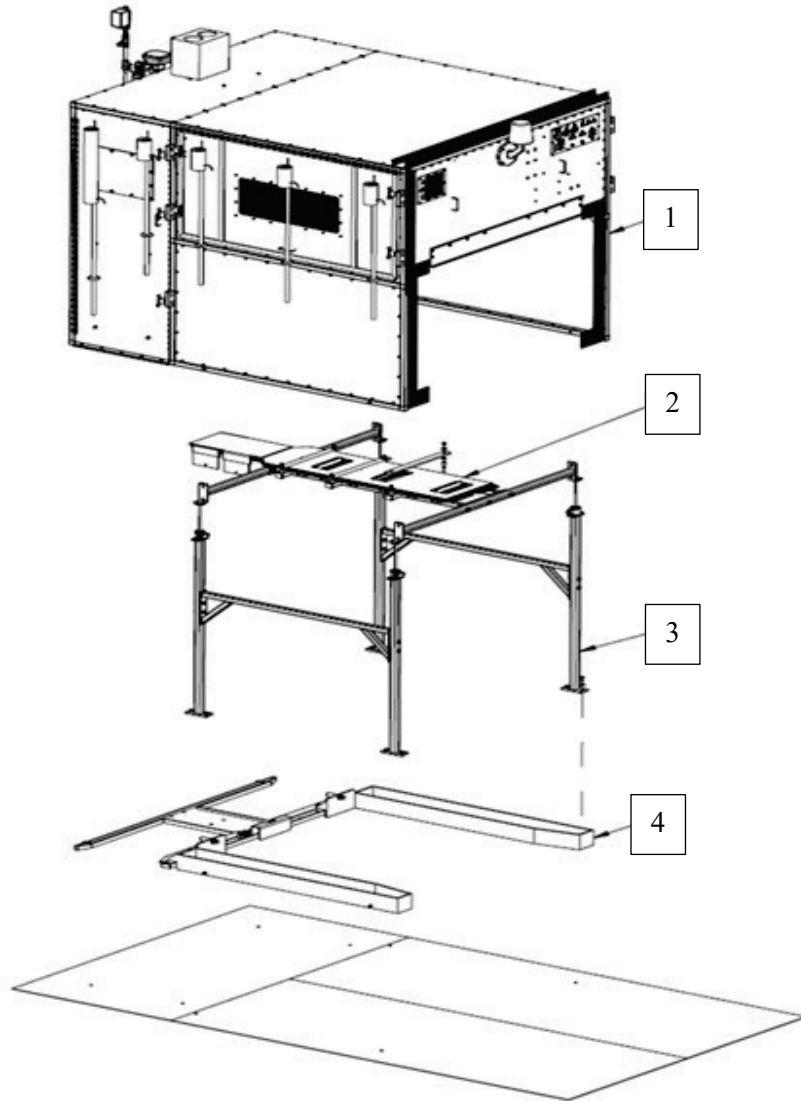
The tank alignment assembly showing (1) the safety enclosure assembly, (2) laminated bus, (3) support structure, and (4) alignment fixture.
